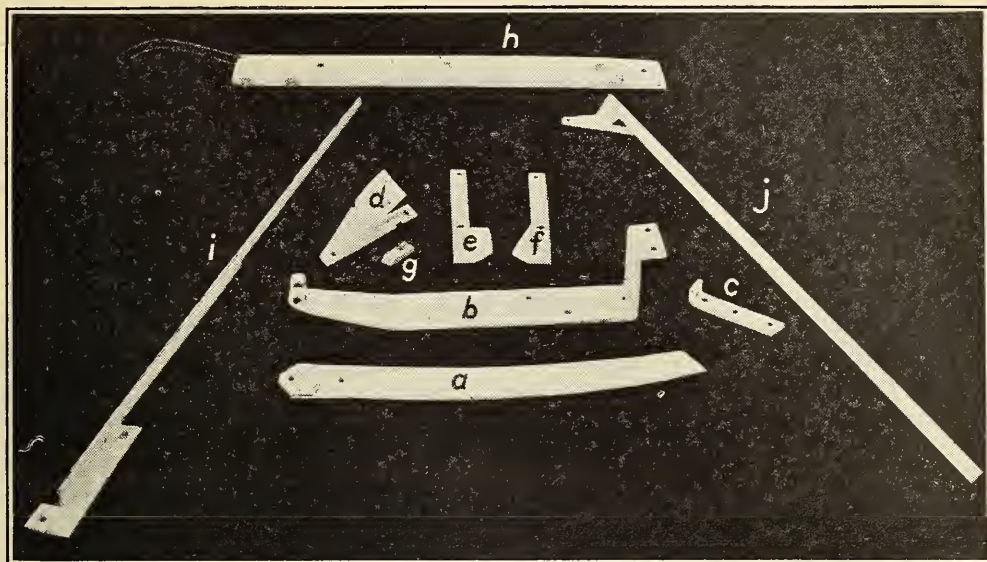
Separate parts of low-cutting attachment for John Deere corn binder: *a*, Stationary knife; *b*, knife bracket; *c*, connecting plate for knife bracket; *d*, elevating chute; *e*, *f*, left and right knives recut; *g*, spacer block for elevating chute; *h*, special backing board; *i*, *j*, lower and upper front throat springs with brackets
